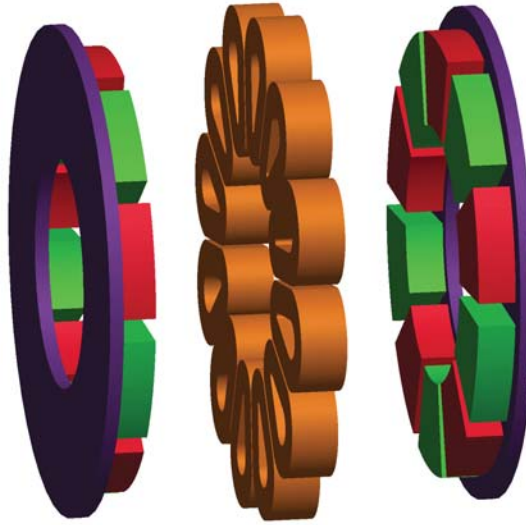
Double-sided AFPM machine with internal air stator core.
